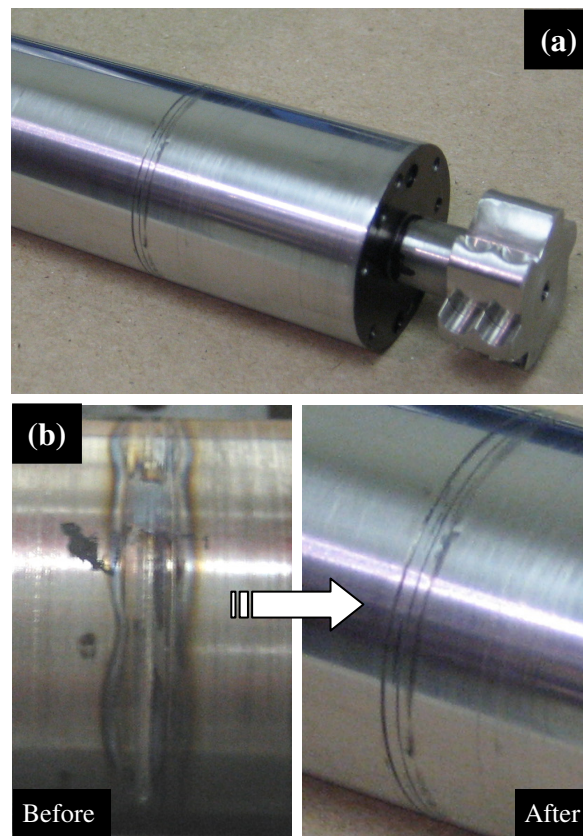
Rotor after polishing to repair damaged surface. (a) “Front” end of rotor with remnant of deep grooves (~ 1 mil). (b) Before and after comparison of damaged region on rotor surface.
